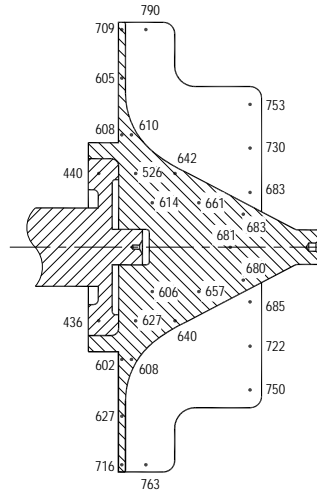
Rocket engine combustion chamber turbo pump cross-section [10]
